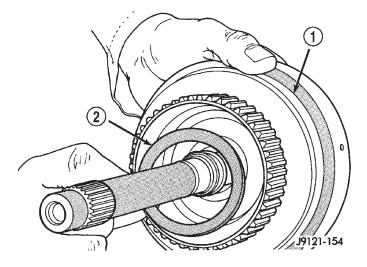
Installing Rear Clutch Thrust Washer 1 – REAR CLUTCH RETAINER 2 – REAR CLUTCH THRUST WASHER (FIBER)
